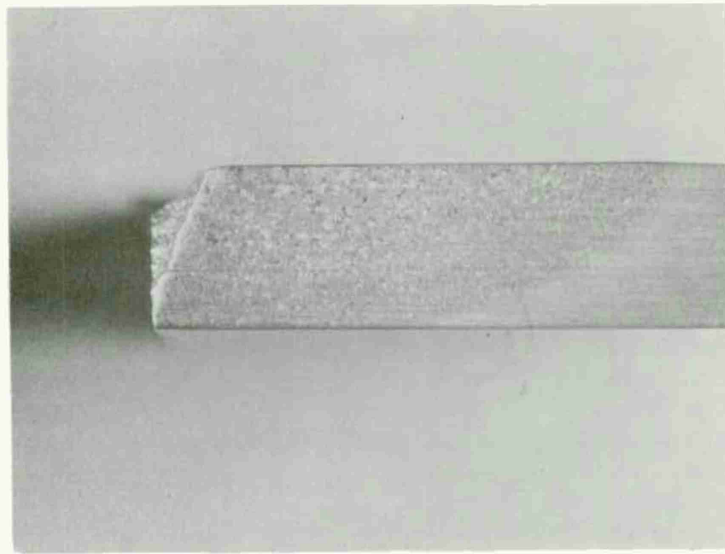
Heat affected zone in tensile coupon which exhibited flat fracture.
